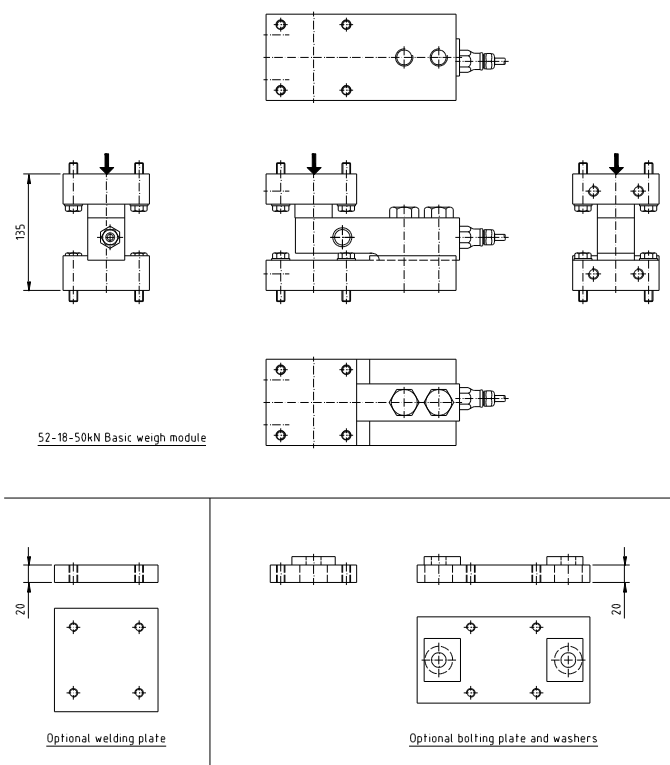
Figure shows 2D views of the 50 kN module and optional welding and bolting plates.
